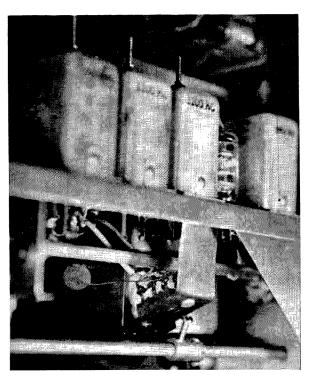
A side view of the conversion showing the position of the switch, shaft coupler and mounting bracket.
